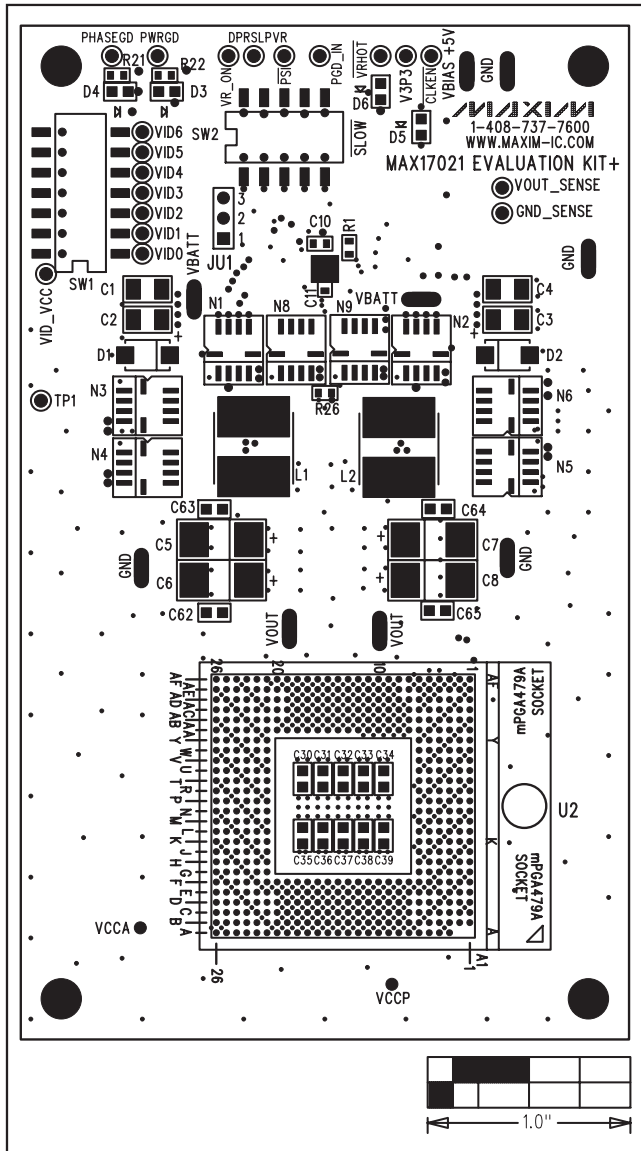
MAX17021 EV Kit Component Placement Guide—Component Side
